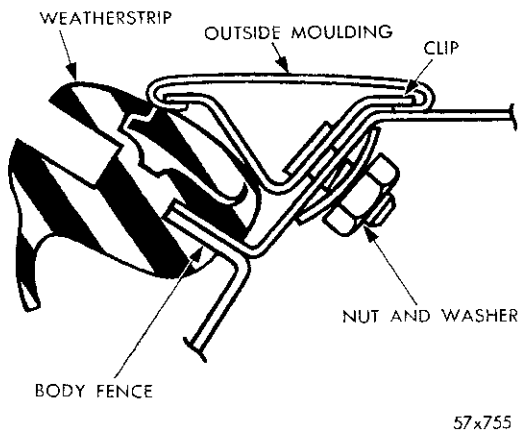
Upper Rear Window Weatherstrip and Moulding
